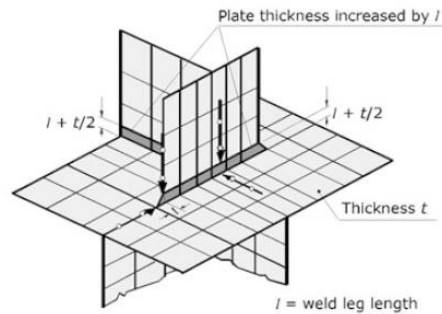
Weld modelling technique reinforced plate strips with inclined ends (Hobbacher A. , 2009)
